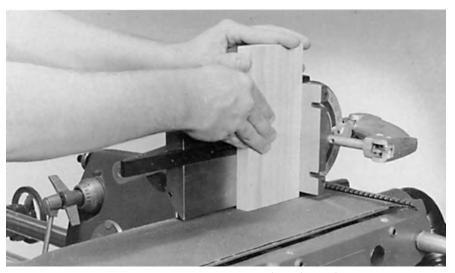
To sand end grain, use the worktable and the miter gauge to support the workpiece. This helps keep the end of the workpiece square to the belt.
